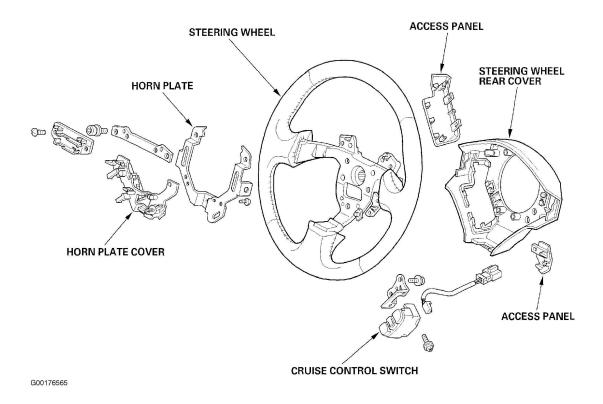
Exploded View Of Steering Wheel Disassembly/Reassembly (RSX) Courtesy of AMERICAN HONDA MOTOR CO., INC.
